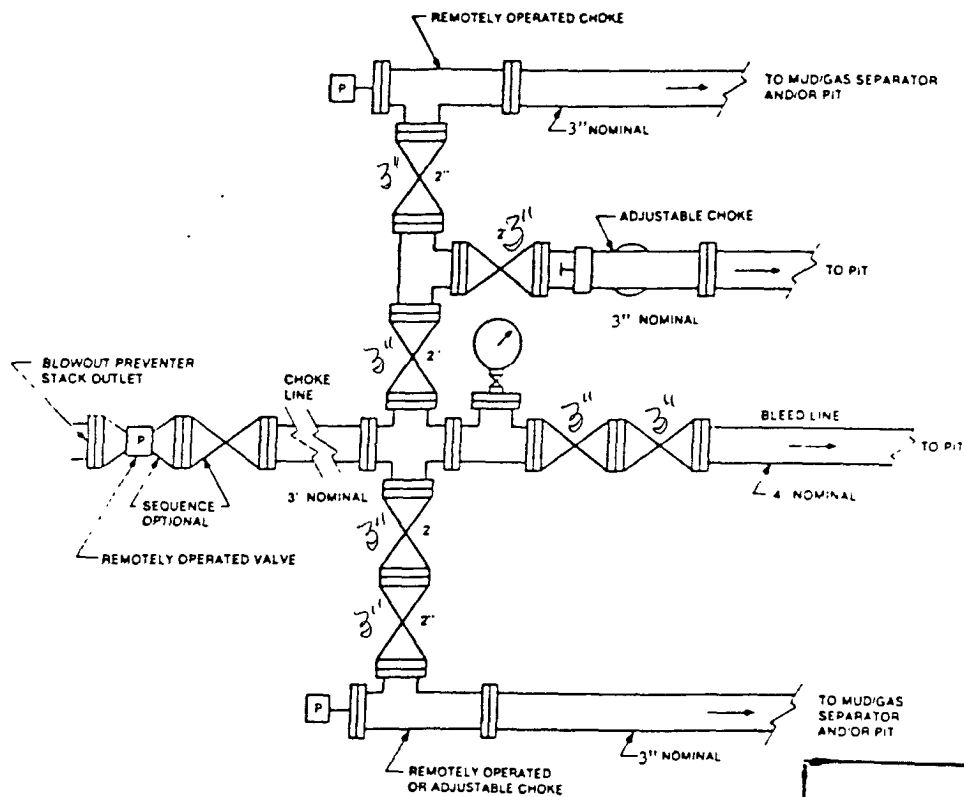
Typical choke manifold assembly for 10M and 15M rated working pressure service — surface installation.
